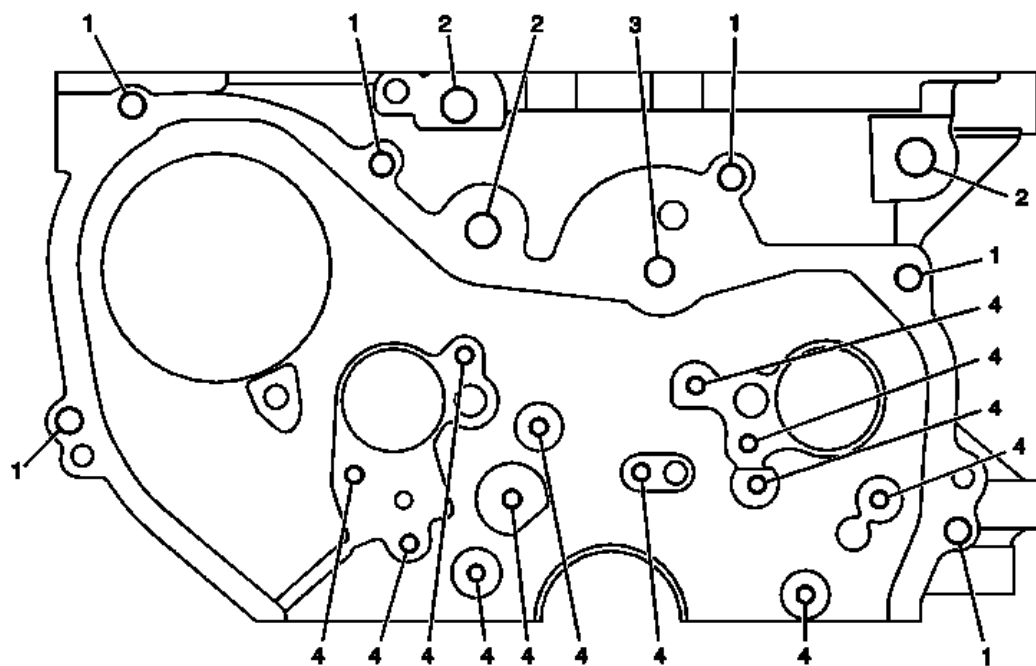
Identifying Bolt Size & Locations On Engine Block - Front View
